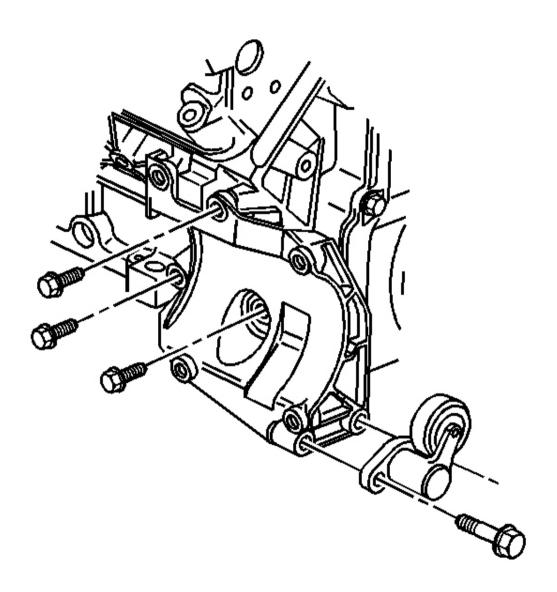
A/C Compressor Bracket Courtesy of GENERAL MOTORS CORP.
